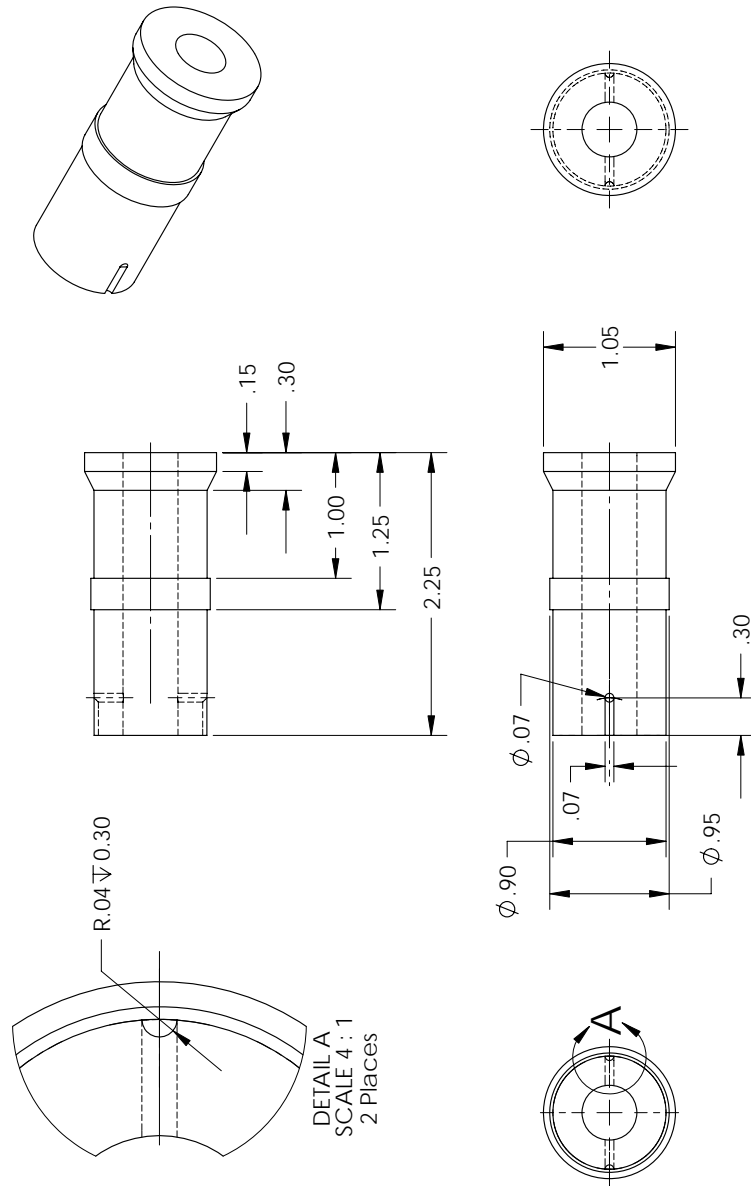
Engineering drawing of the tail insert which terminates the back of the array
